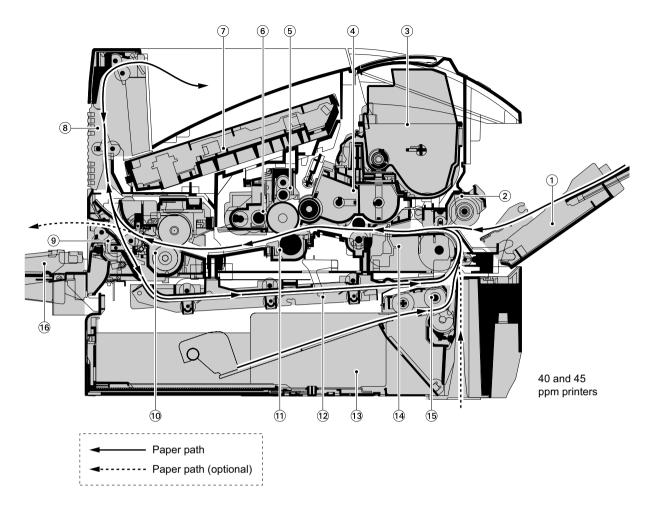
Machine cross section (40 and 45 ppm printers)
